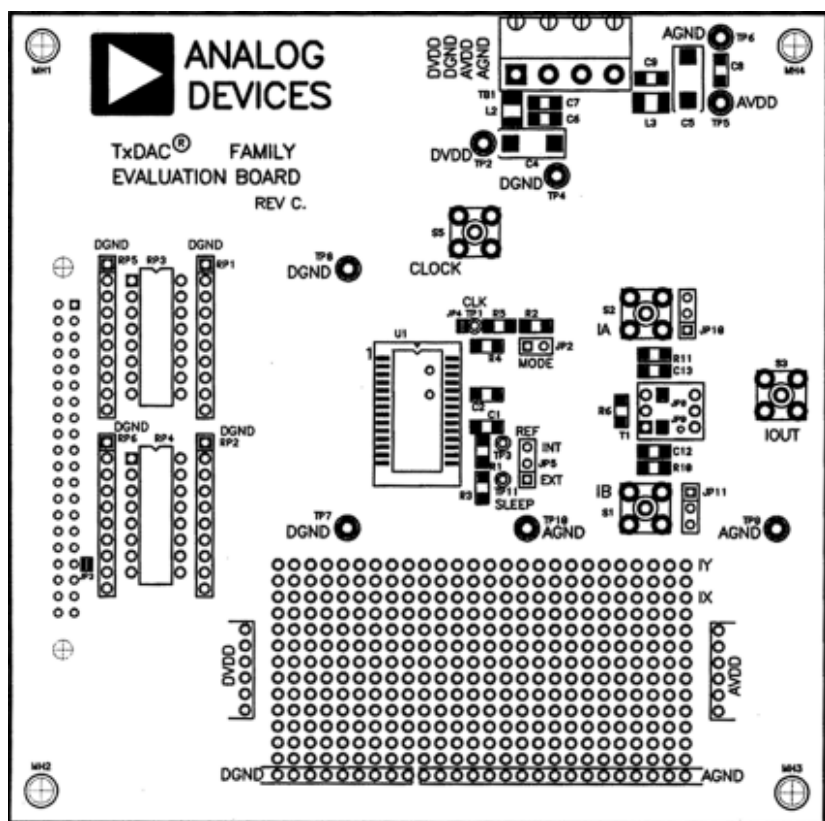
SOIC Evaluation Board Assembly—Primary Side
